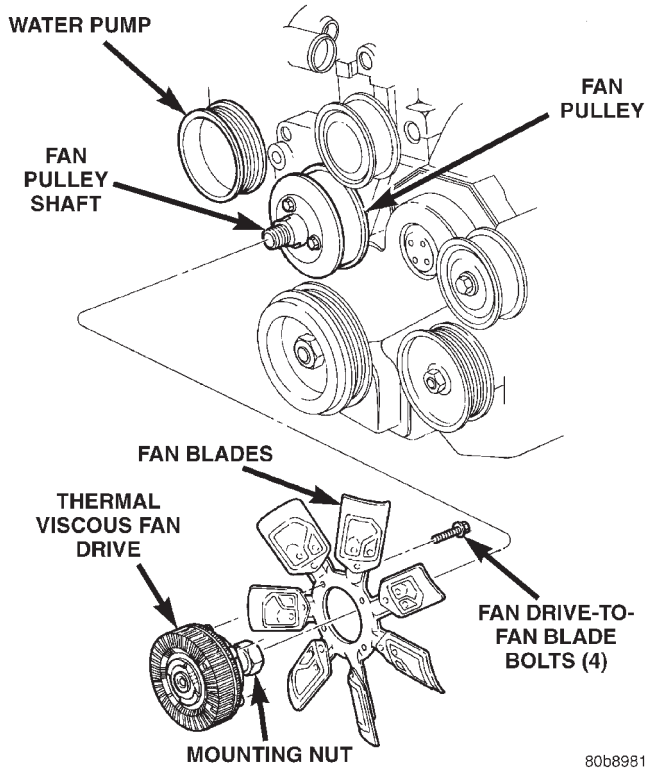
Thermal Viscous Fan Drive and Blade Assembly
